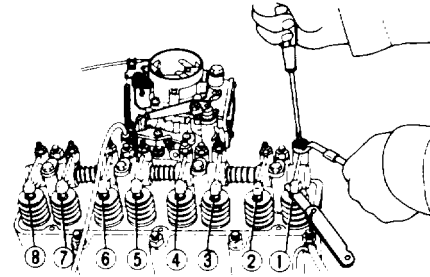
Adjusting Valve-Tappet Clearance.
